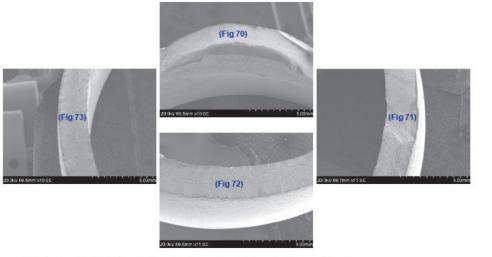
Close-up of fracture surface [Retract Rod]
